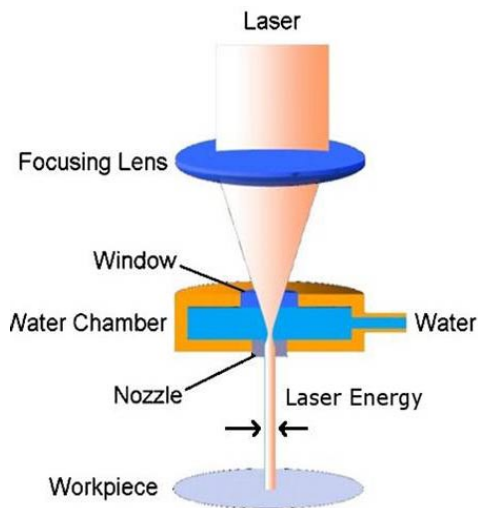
Schematic of the water guided laser drilling system. The module comprises the water chamber, window and nozzle assembly.
